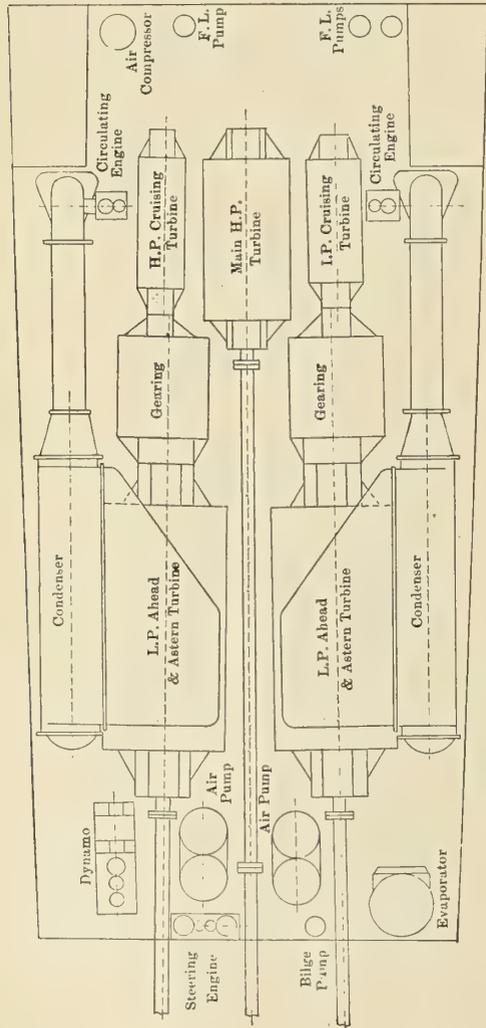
Plan of Machinery Arrangement, Torpedo Boat Destroyer With Geared Cruising Turbines. Total Shaft Horsepower, 25,000; Revolutions of High Pressure and Low Pressure Turbines and Propeller Shafts, 750; Reduction Ratios: High Pressure Cruising Turbine, 6.0; Intermediate Pressure Cruising Turbine, 6.0
